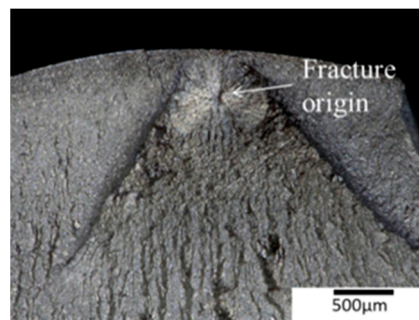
Fracture surface of γ' test specimen ($\tau_a = 609$ MPa $N_f = 1.03 \times 10^6$).
